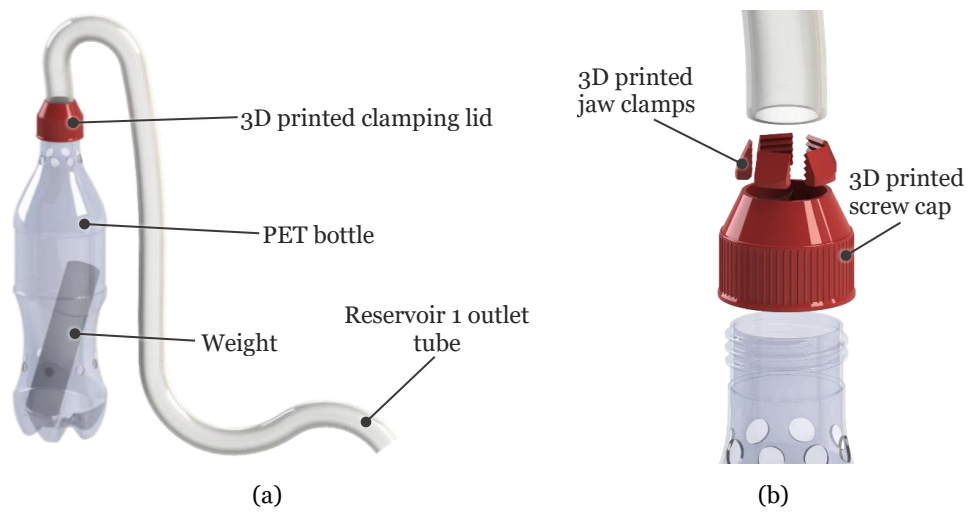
Rendered view of the solution to minimize air intake in working fluid circuit 2, showing the weighted bottle connected to the tube (a) and the detail of the 3D printed clamping lid (b).
